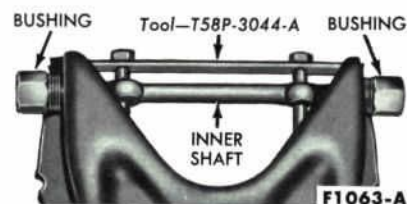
Upper Arm Inner Shaft Bushing Installation
